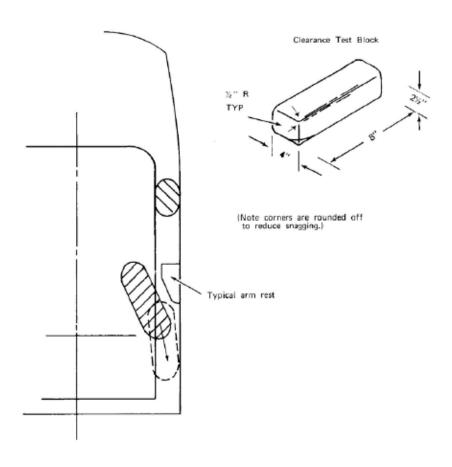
USE OF CLEARANCE TEST BLOCK TO DETERMINE HAND/ARM ACCESS
